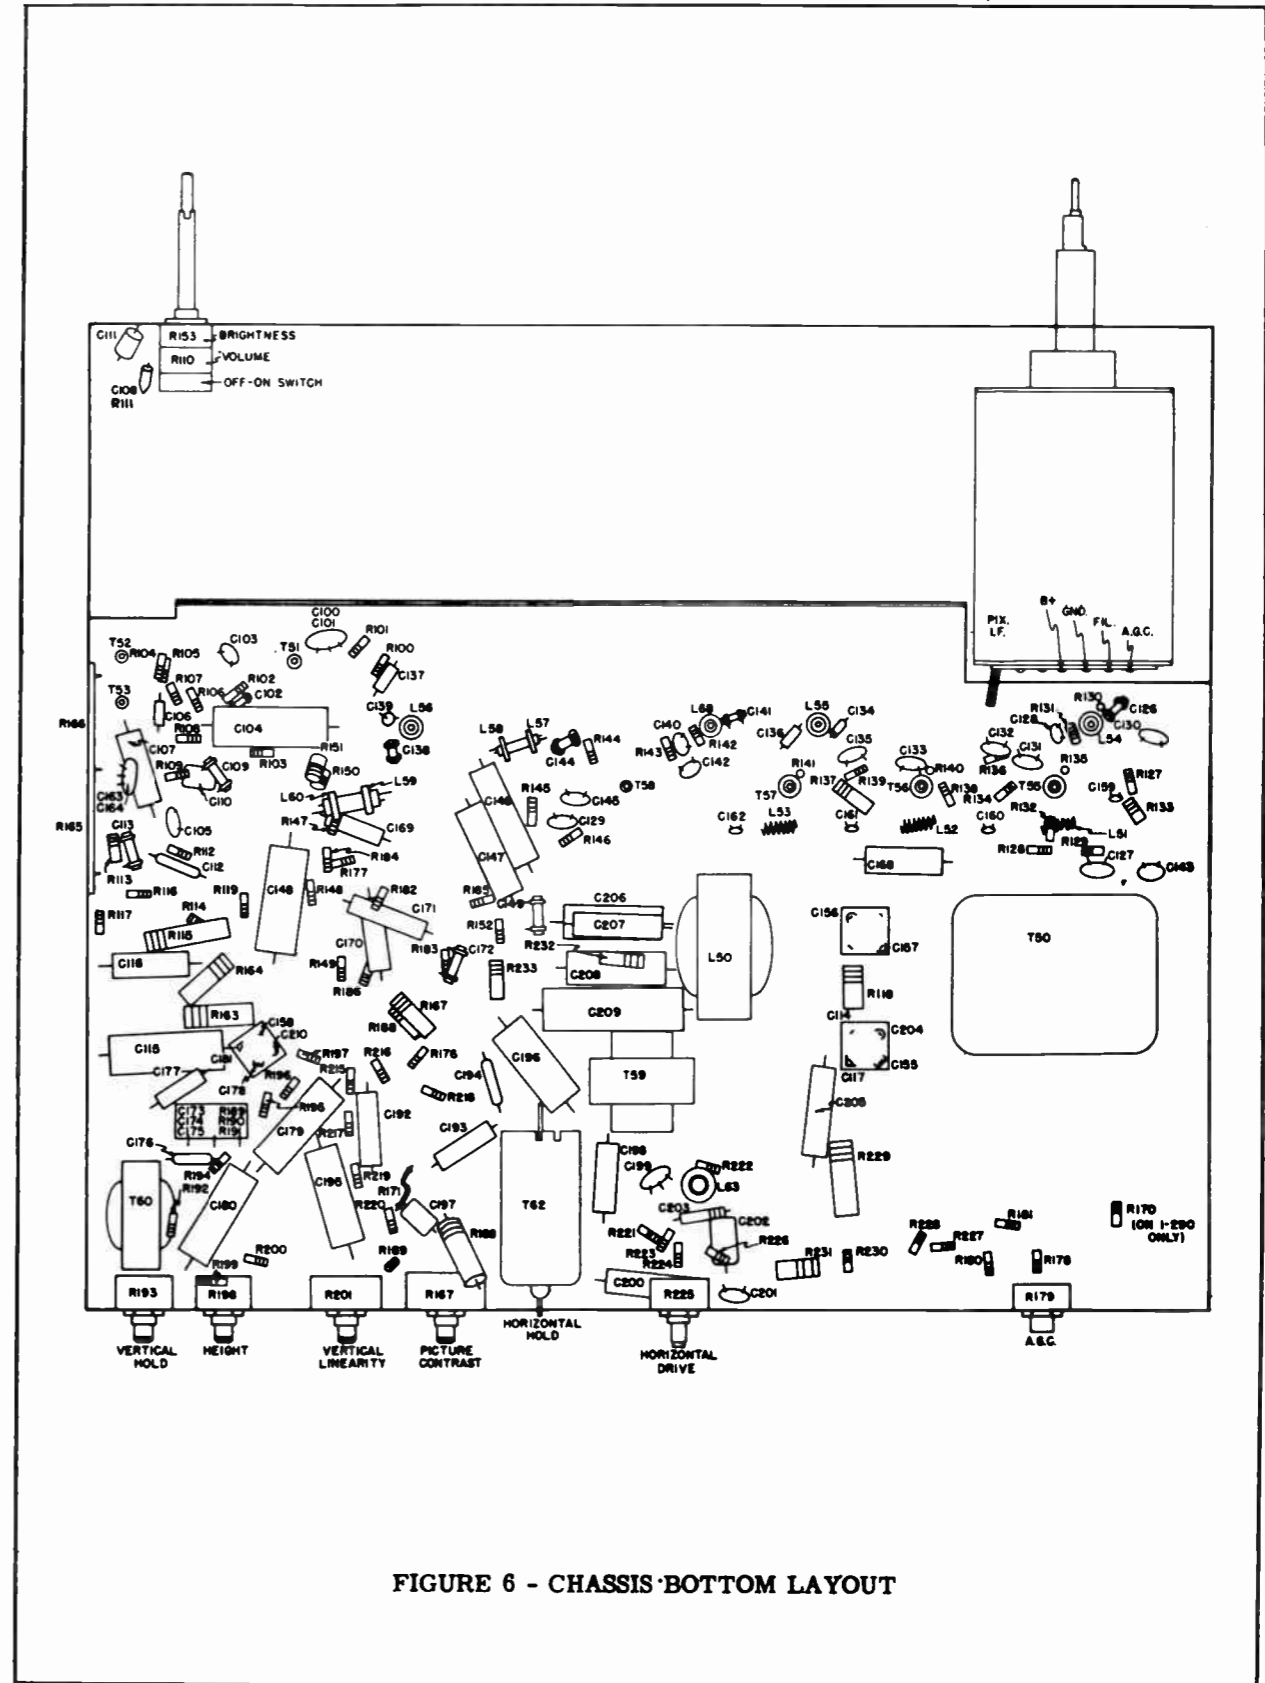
CHASSIS BOTTOM LAYOUT
